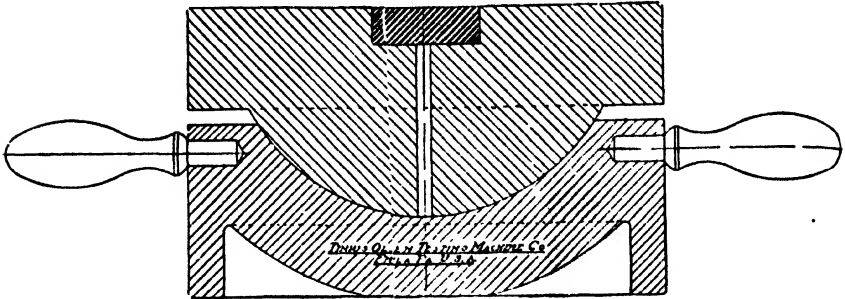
COMPRESSION TEST BLOCK WITH SPHERICAL ADJUSTMENT, FOR USE ON THE TABLE OF A UNIVERSAL TESTING MACHINE
